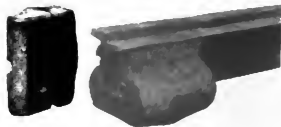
CAST WELDED JOINT AND MOLD
